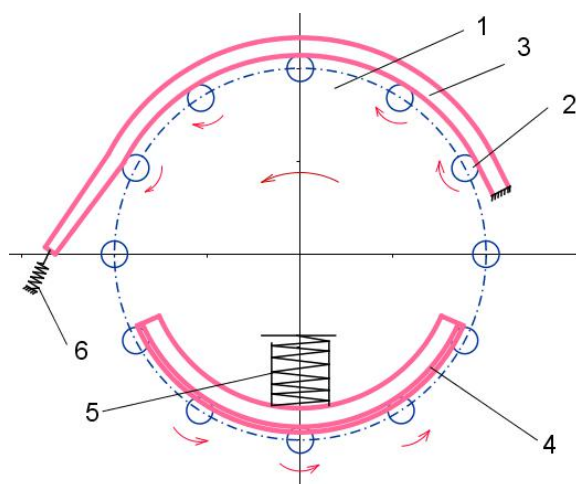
Scheme of a serial vertical-spindle drum: 1-drum; 2-spindle; 3,4-friction drives of the spindles; 5,6-springs
